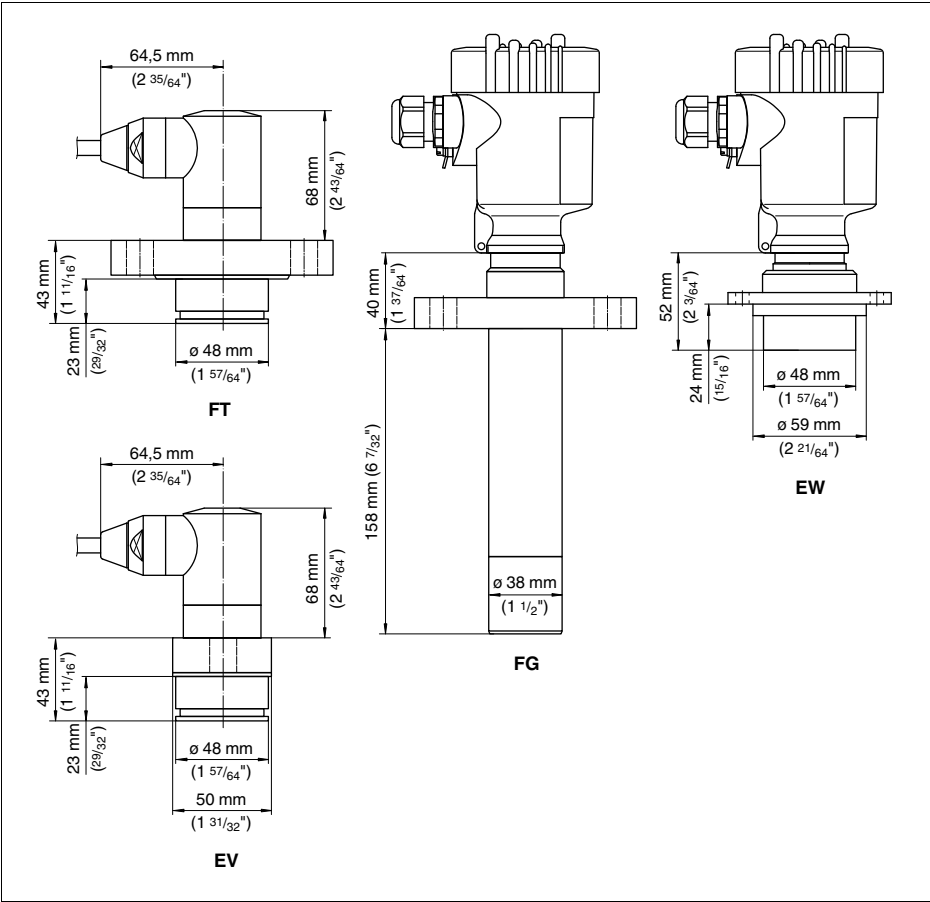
VEGABAR 64 - extension fitting for paper industry: EV/FT = absolutely flush for pulper (EV: flange 2-times flattened), FG = extension for ball valve fitting, EW = flange for manometer lug
